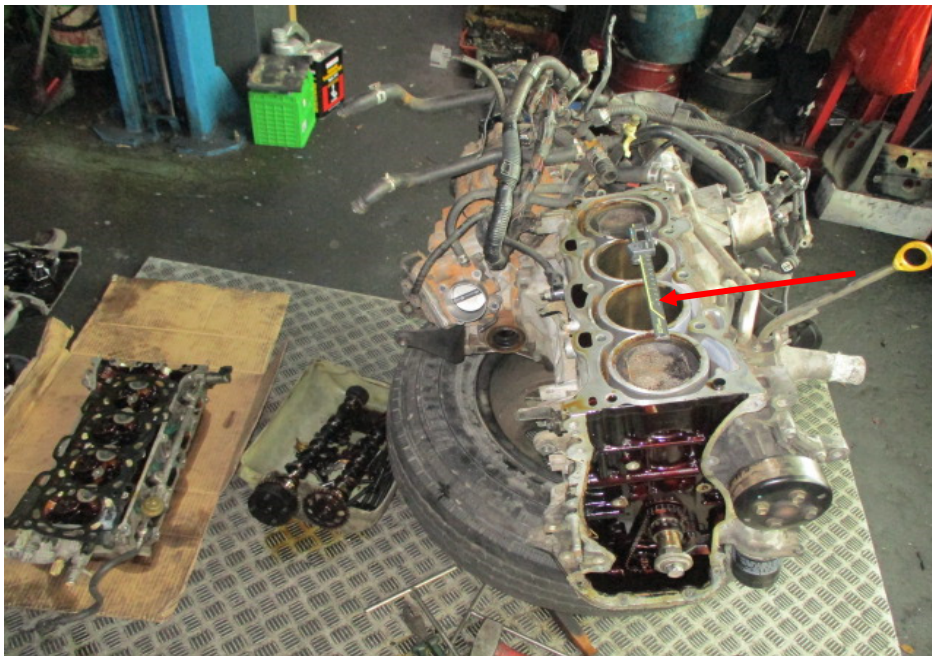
shows a general view of the Toyota engine that I had inspected. The Toyota engine was observed to be a used engine and complete assembly with all mechanical parts still intact, within the engine housing.
